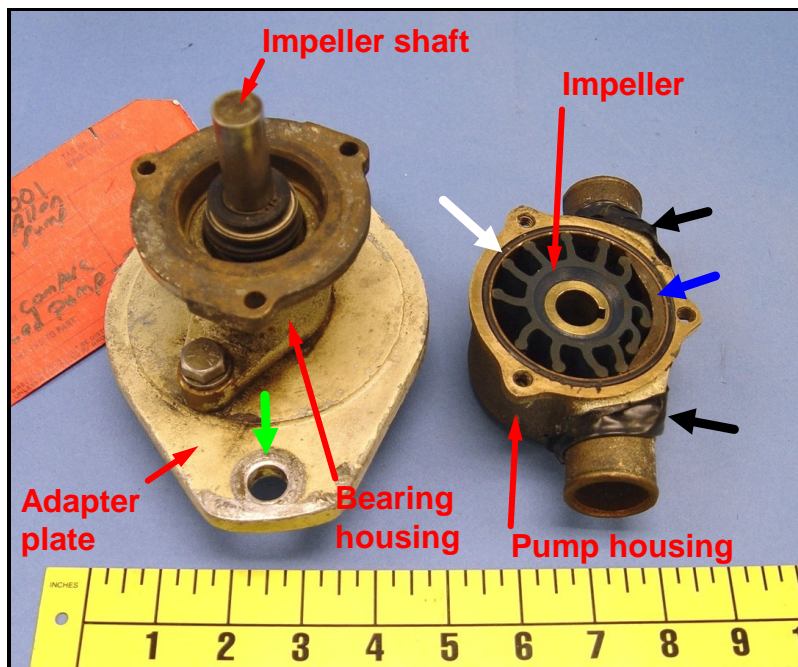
The previous pump components received for examination, with the pump housing separated from the bearing housing.
